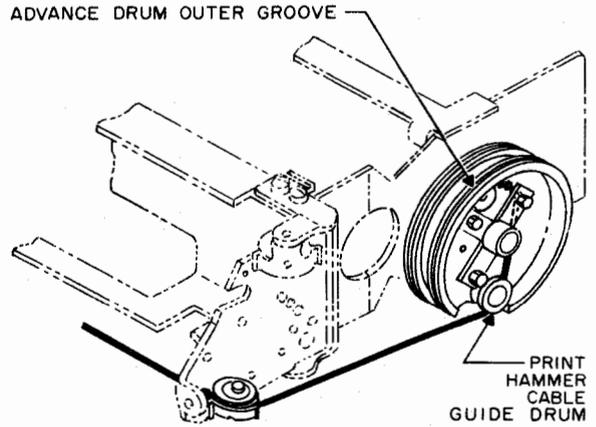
Print Hammer Cable Installation, Securing Cable to Advance Drum
